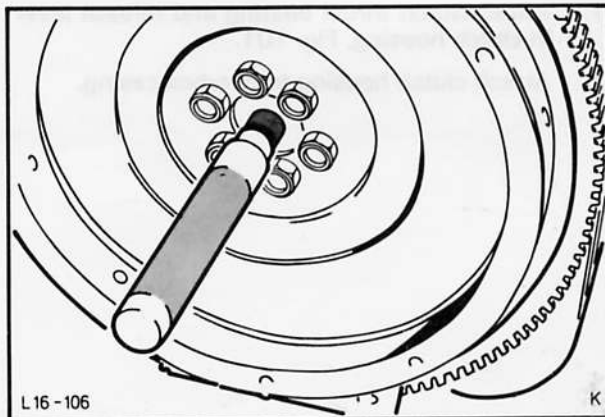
Fit pilot bearing with Special Tool No. 21-044/21-080
